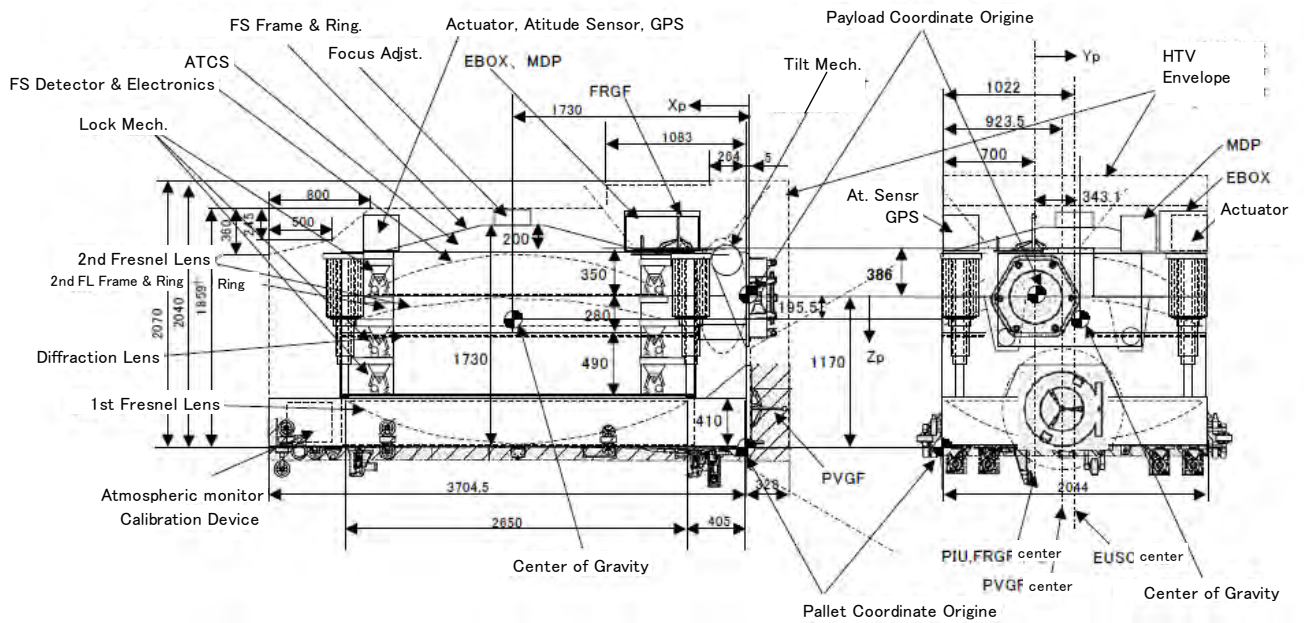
Side view of JEM-EUSO (stowing configuration in HTV) (ref. [7.1])
